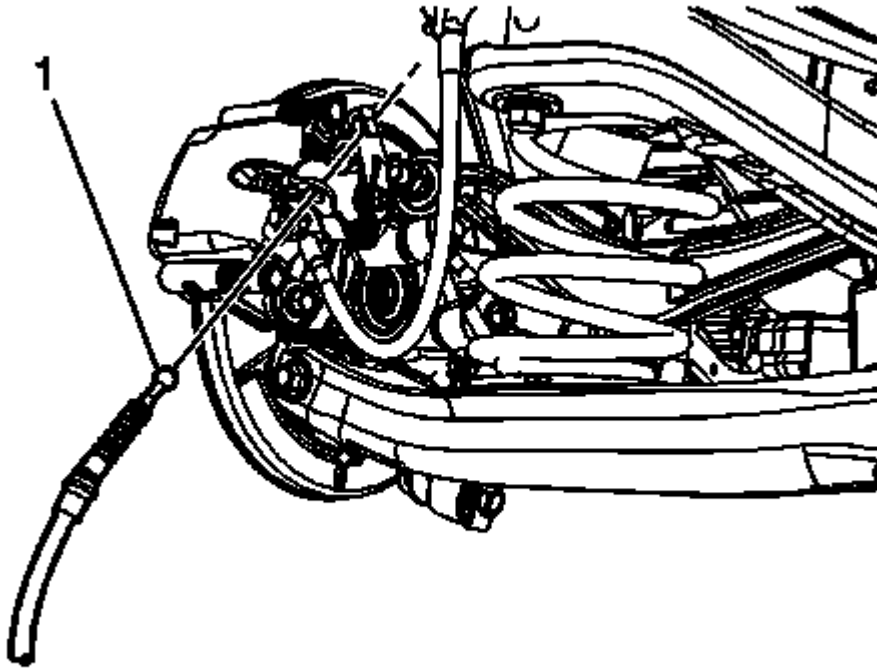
Rear Parking Brake Cable And Parking Brake Actuator Lever
